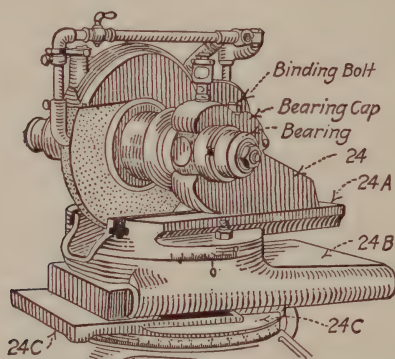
Grinding-machine wheel head. The wheel stand (24) may be clamped in the desired position on the wheel-stand platen (24A). The platen may be swivelled on the wheel-stand slide (24B). The wheel-stand slide bearings are very accurately scraped to fit similarly finished surfaces on the wheel-stand slide bed (24C), and the movement of the slide (24B) on the bed (24C) gives the cross-feed of the wheel. The bed is pivoted and may be swivelled and clamped in an angular position for the purpose of grinding abrupt tapers or angles. See Fig. 281.
